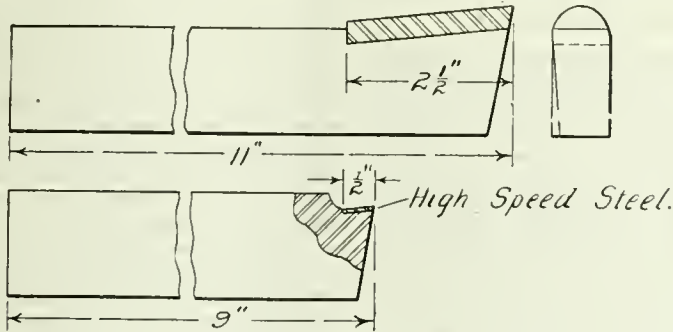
LATHE TOOL WITH WELDED TIP.
